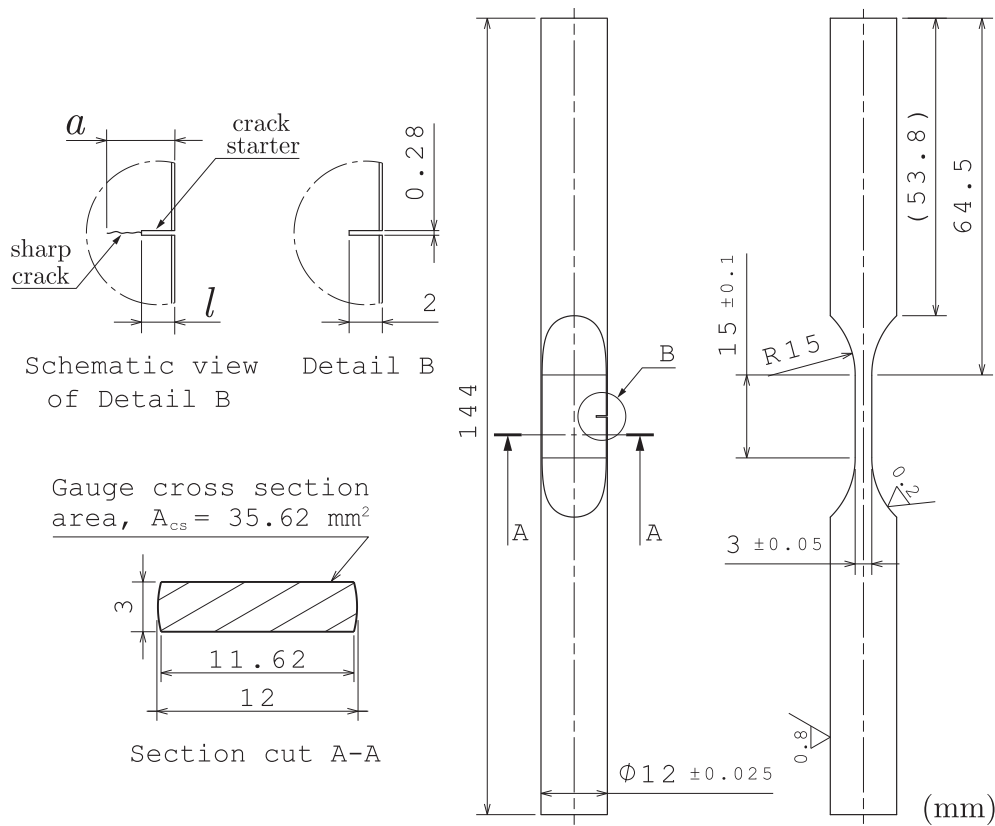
Detailed drawing of the single edge crack tension specimen used for thermomechanical fatigue crack growth. The schematic view of detail B show the crack length, a , and the crack starter length, l . Section cut A-A shows the gauge cross section area, A_{cs} , with no sharp crack and no crack starter.
